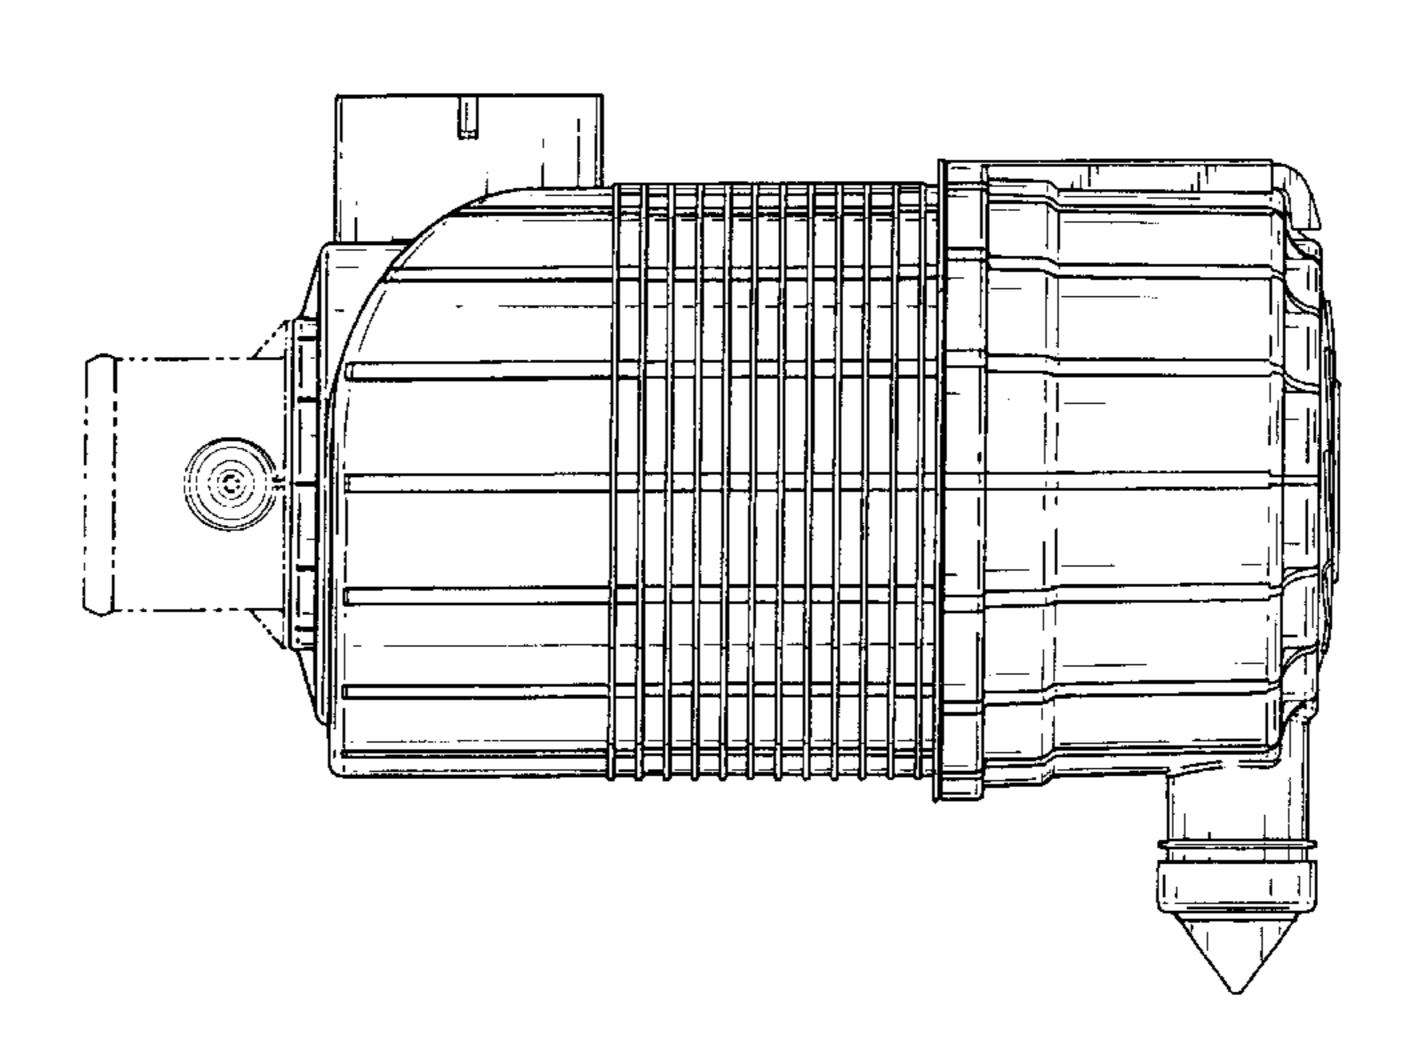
is a right side elevational view of a first alternate embodiment to the housing of FIG. 1; the front side elevational view of the embodiment of FIG. 8 being identical to that illustrated in FIG. 1; the back side elevational view of the embodiment of FIG. 8 being identical to that illustrated in FIG. 2; the bottom plan view of the embodiment of FIG. 8 being identical to that illustrated in FIG. 3; the top plan view of the embodiment of FIG. 8 being identical to that illustrated in FIG. 4; and the left side elevational view of the embodiment of FIG. 8 being identical to that illustrated in FIG. 6; thus, the only substantial differences between the embodiment of FIG. 8 and the embodiment of FIGS. 1-6 being in the right side elevational view;
